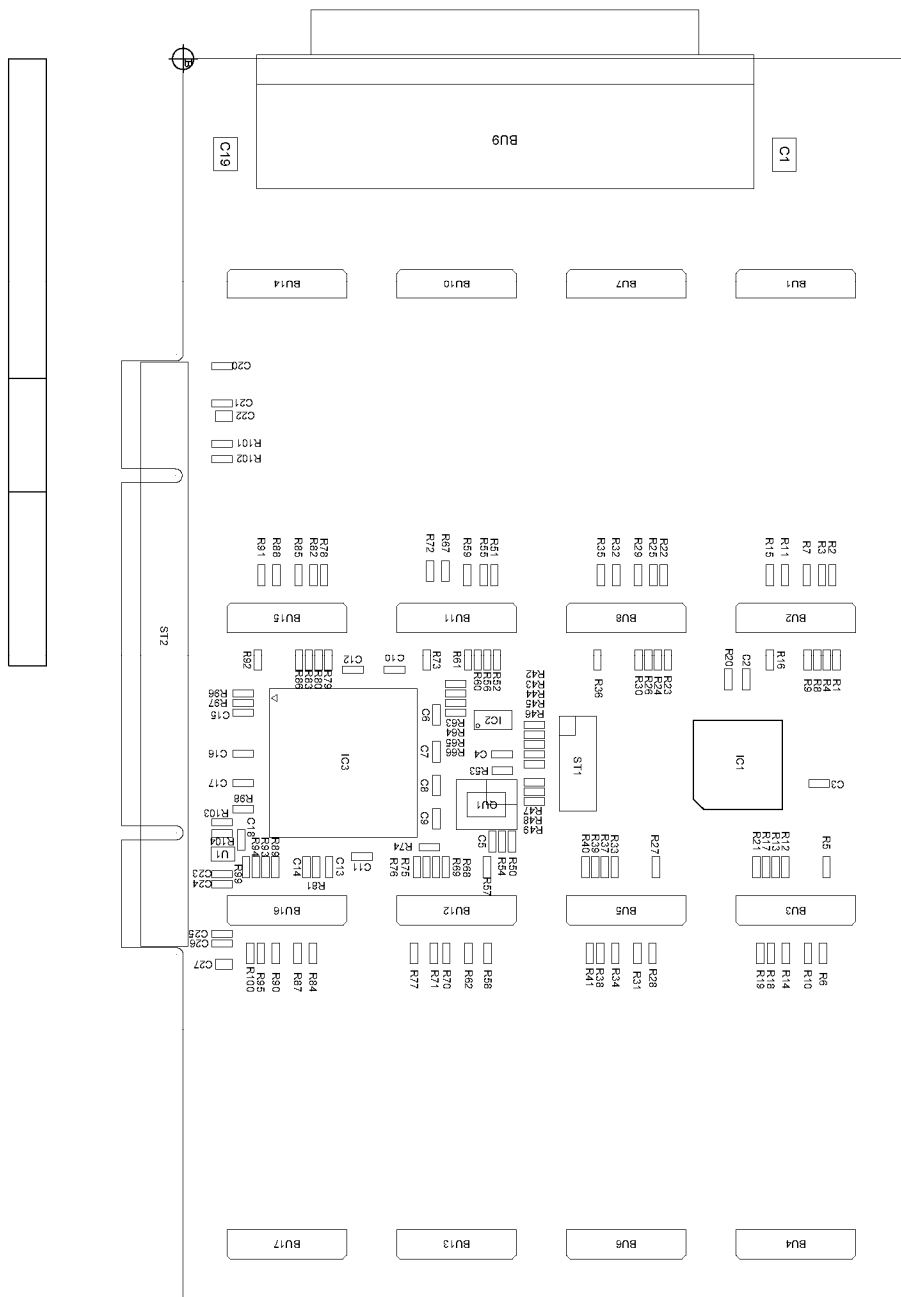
Component scheme of the APCI-7800-3 (solder side)
